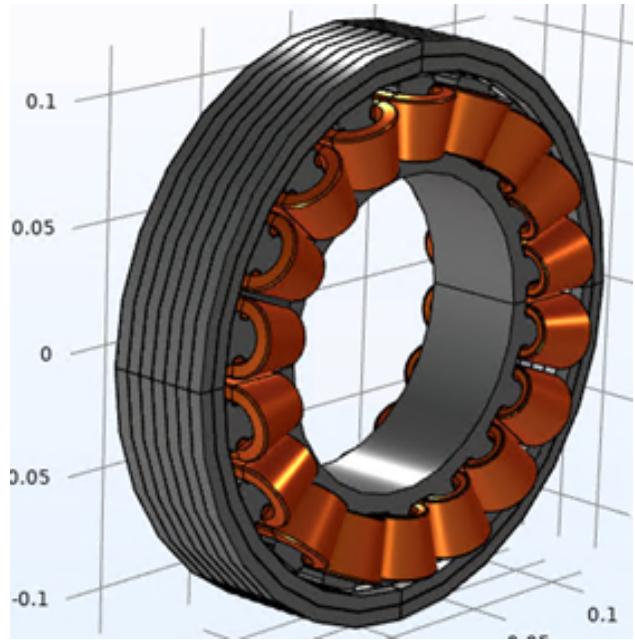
Three-dimensional geometry of the proposed continuous halbach array rotor machine
